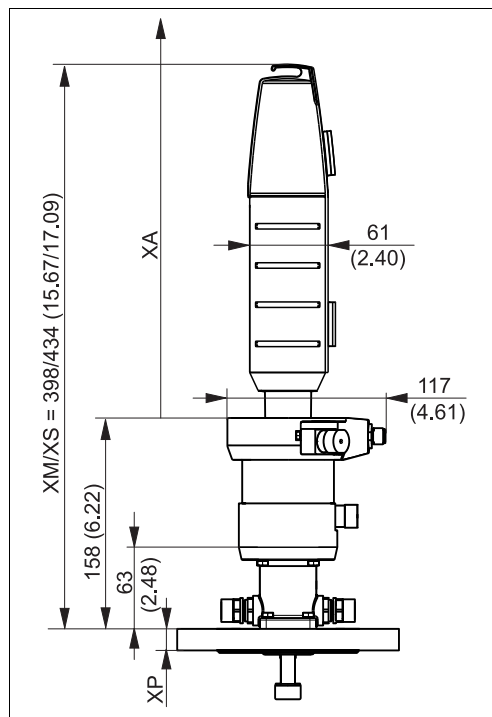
Pneumatic drive, short version, dimensions in mm (inch)
